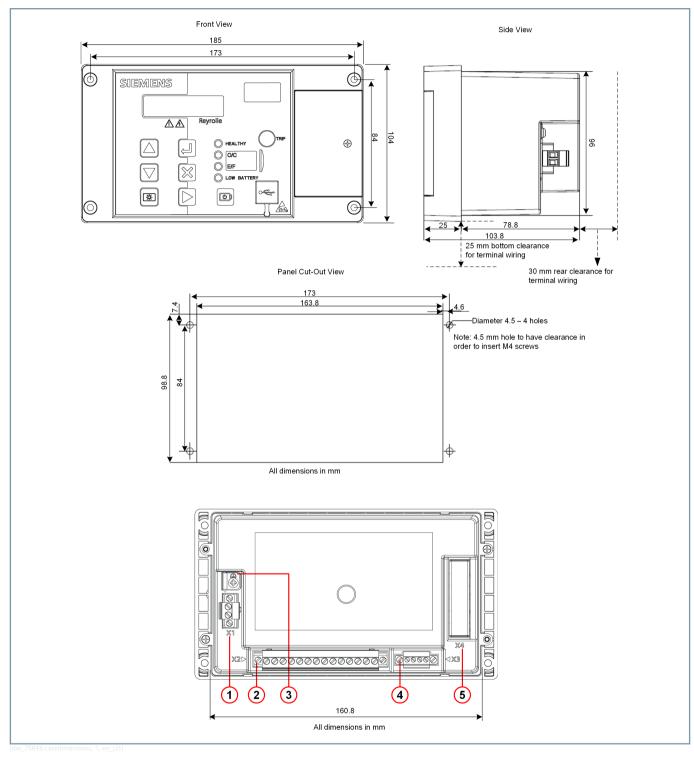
/1 Front View, Side View, Panel Cut-out View and Rear Terminal View
